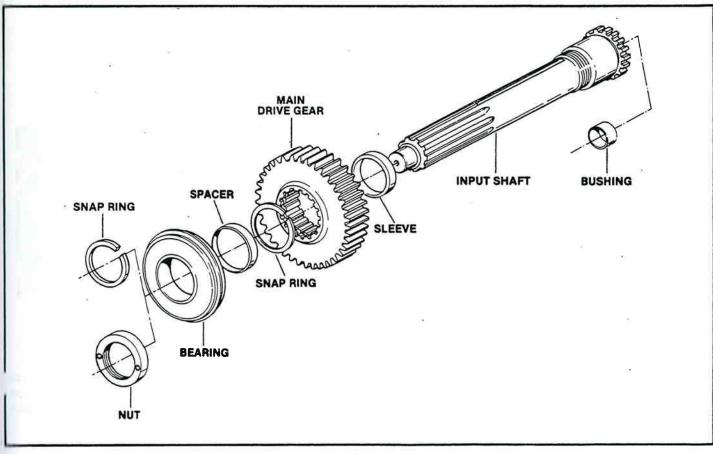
Drive Shaft (Input Shaft) and Related Parts.
